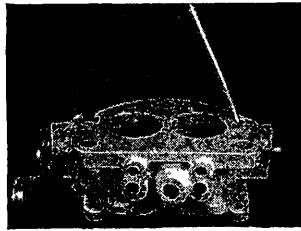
Install throttle shaft and lever, loosen throttle lever and throttle centering ring screw. Back out throttle lever adjusting screw
